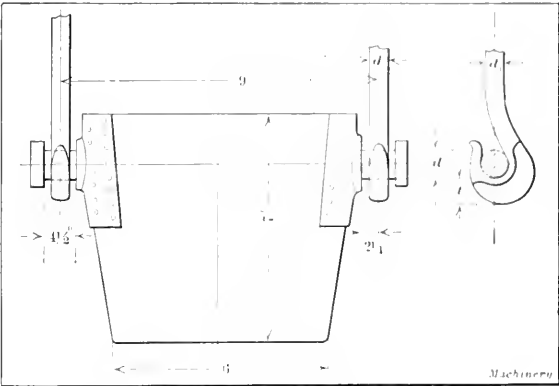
Crane Ladle for which Dimensions of Trunnions and Crane Hooks are required
